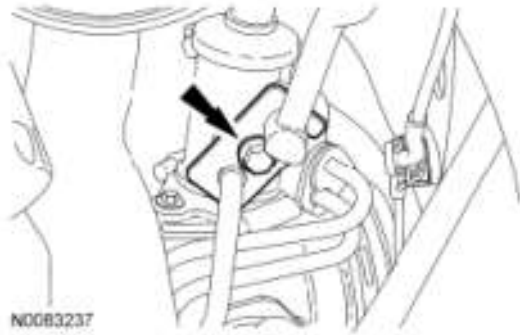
Locating Power Steering Hose Clamp Plate And Bolt
